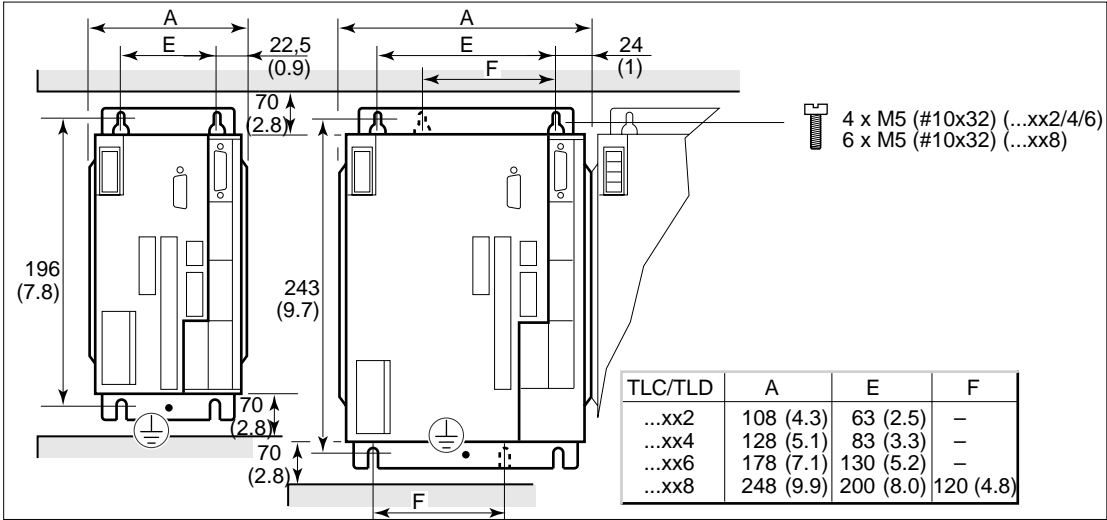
Mounting distances, dimensions in mm (in.)
